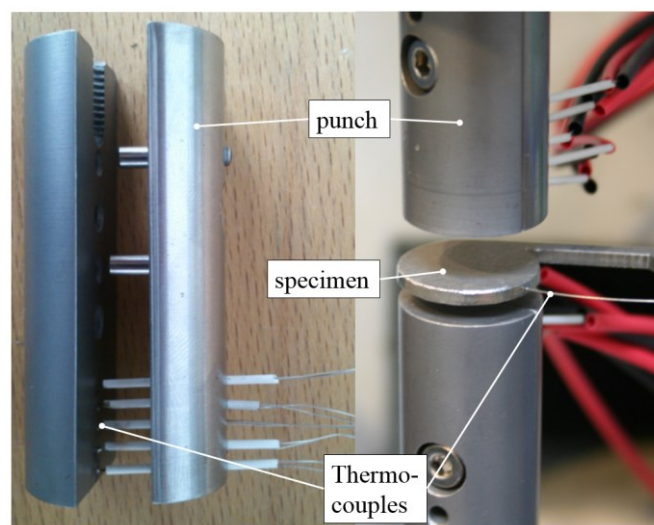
left: cut tool with implemented thermocouples; right: test configuration of upper and lower punch
